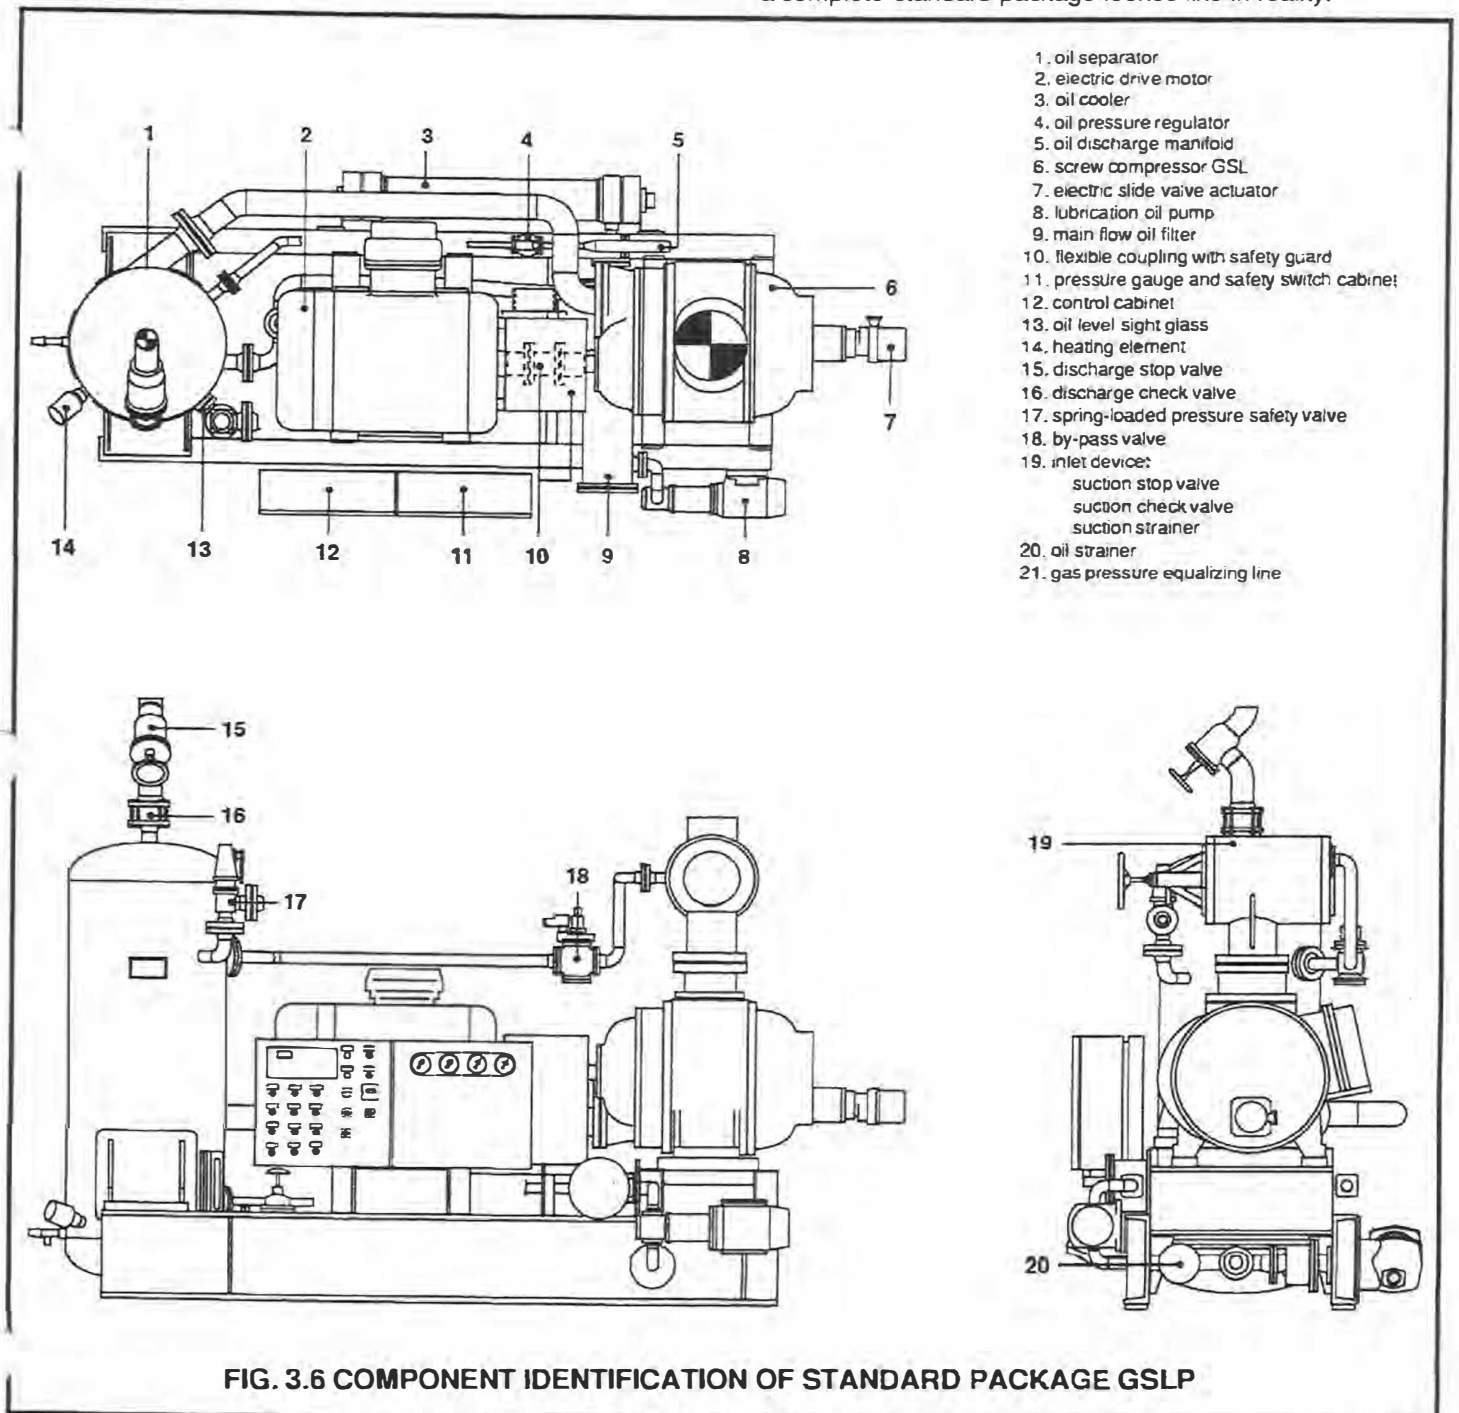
COMPONENT IDENTIFICATION OF STANDARD PACKAGE GSLP
